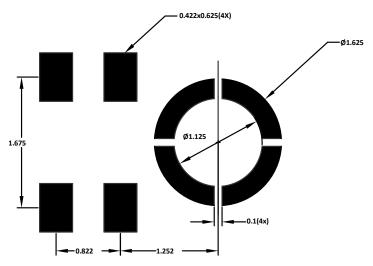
Recommended Solder Paste Stencil Pattern Layout
